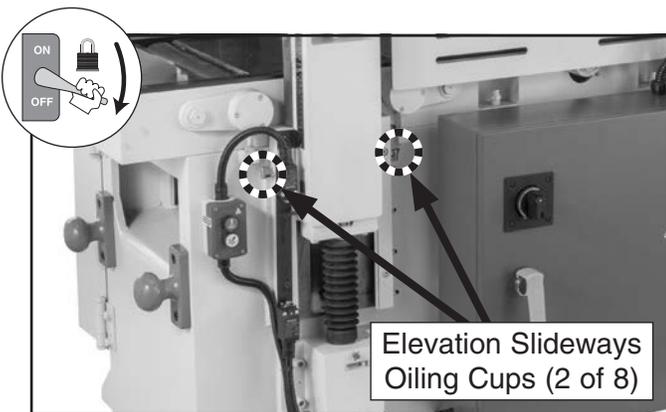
Location of elevation slideway oiling cups (2 of 8).
